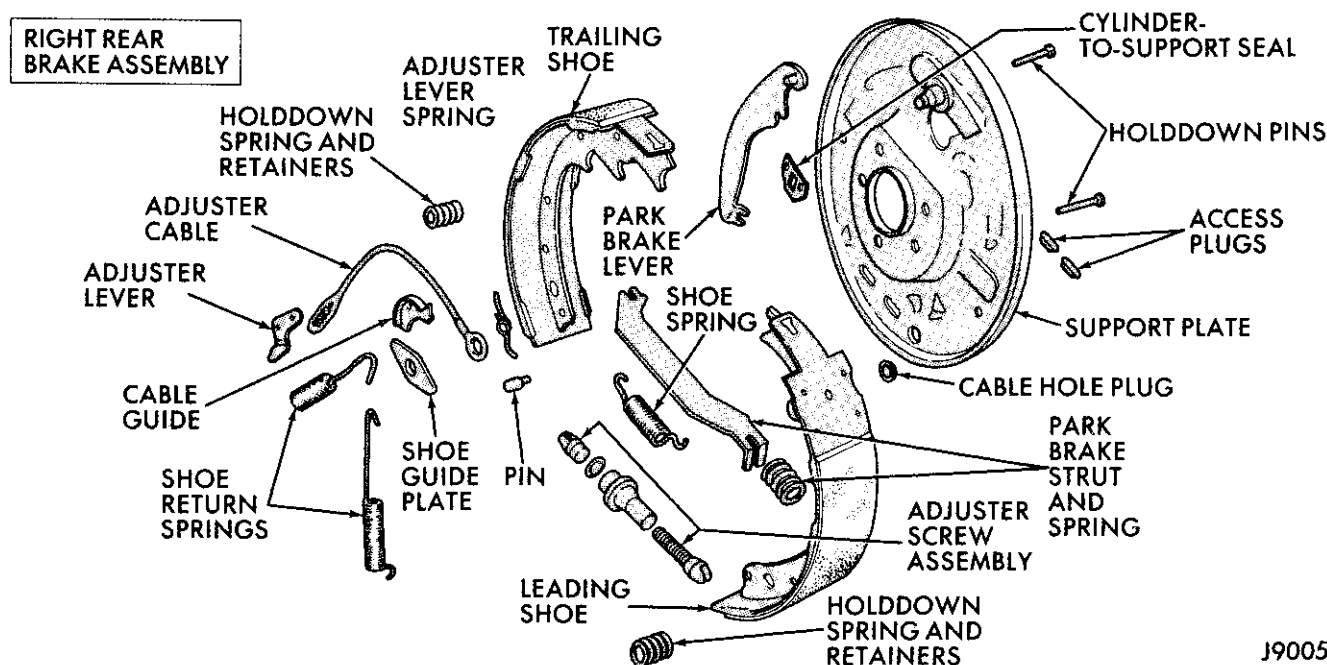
Nine Inch Drum Brake Components—XJ/MJ/YJ
